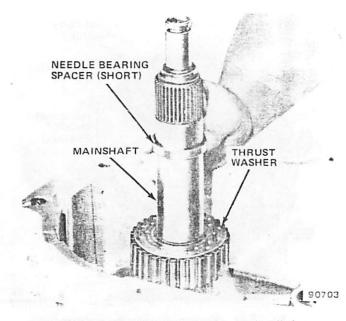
D-64 Mainshaft and Thrust Washer Installation
